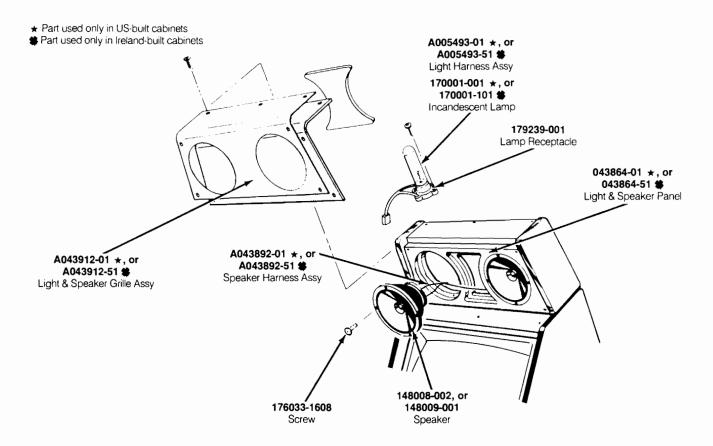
Light and Speaker Panel Assembly A043901-01 A (US) and A043901-51 A (Ireland)
